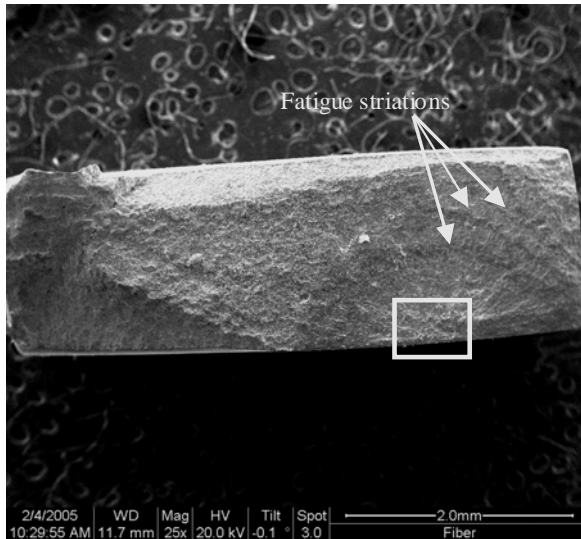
Specimen F/G-01, overall view of fracture surface
